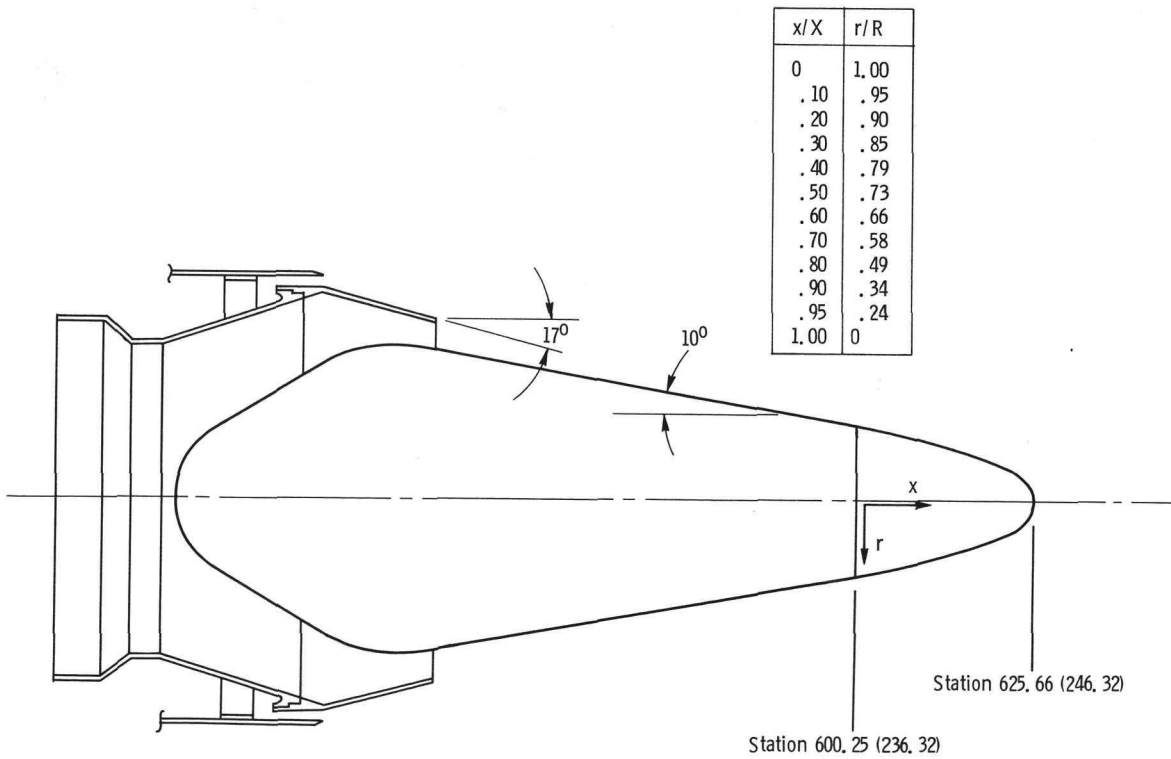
Basic plug nozzle geometry. (All dimensions are in cm (in.)) Axial distance from station 600, 25 (236, 32) to plug tip, $X = 25.40$ cm (10.00 in.); radius of plug at station 600, 25 (236, 32), $R = 10.65$ cm (4.19 in.).
